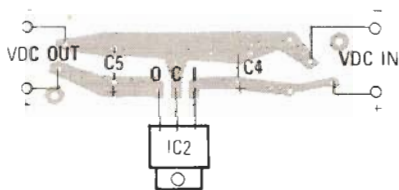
THE VOLTAGE-REGULATOR circuit only contains three parts, and it is assembled on a small PC board.
